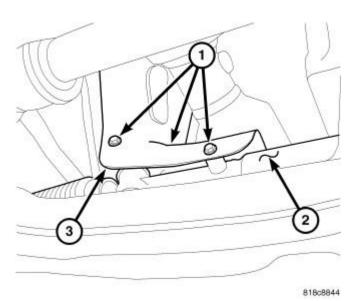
Steering Gear Heat Shield & Bolts Courtesy of CHRYSLER GROUP, LLC
